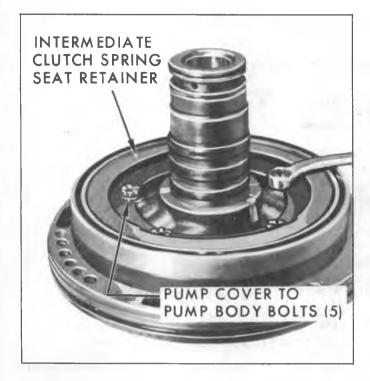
M--Removing Pump Cover to Pump Body Bolts
